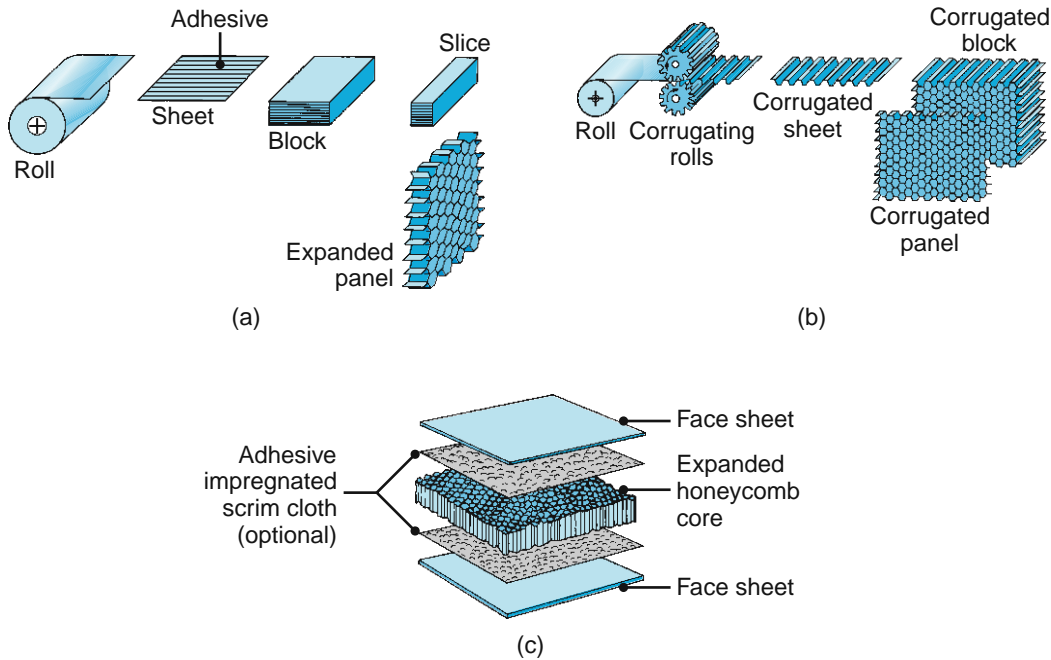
Methods of manufacturing honeycomb structures: (a) expansion process; (b) corrugation process; (c) assembling a honeycomb structure into a laminate.
